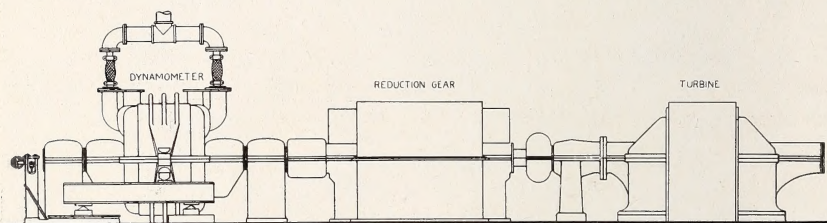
Diagram showing Arrangement of Turbine, Gear and Brake during Test.
